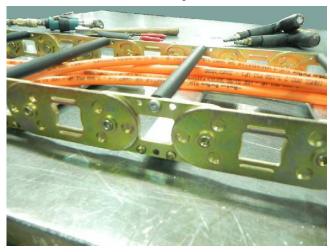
Powertrack Installation Tower Boom (Sheet 3 of 3)
